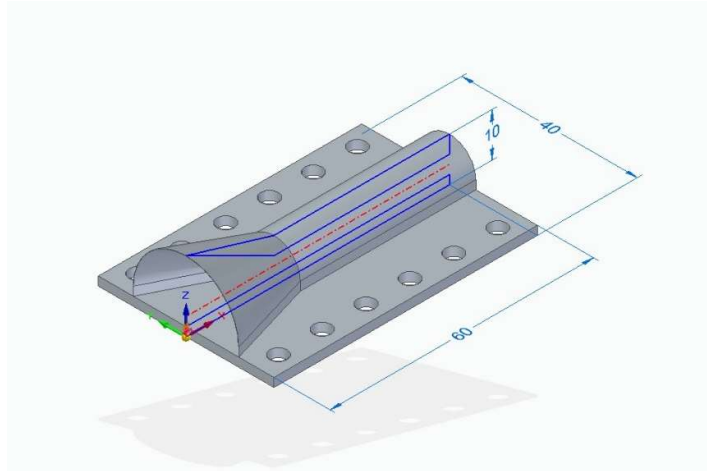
The second guiding device in Solid Edge. The measurements are in mm.
